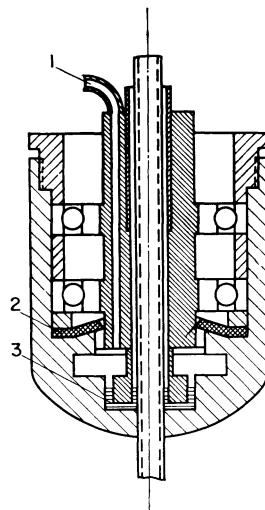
Rotary seal with mercury and guard vacuum for stationary shaft and rotating housing. After Brueschke¹⁷⁶ (*Courtesy of The American Institute of Physics*)
